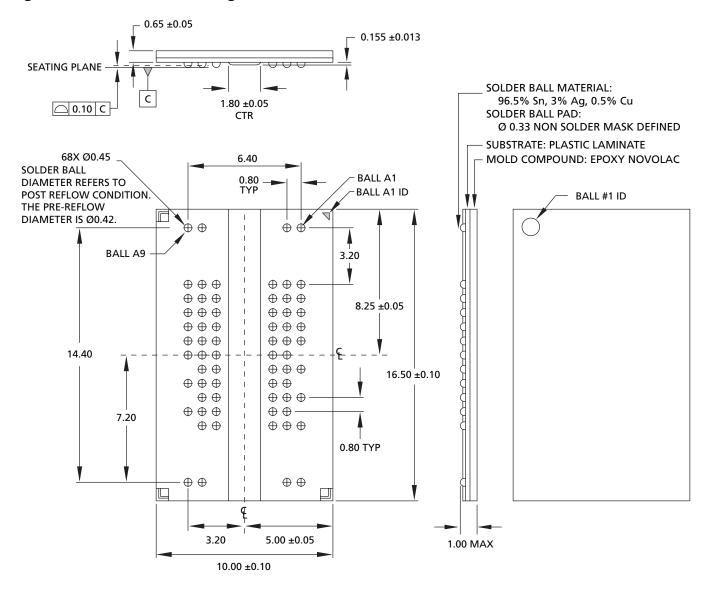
84-Ball FBGA Package - 10mm x 16.5mm (x16)
